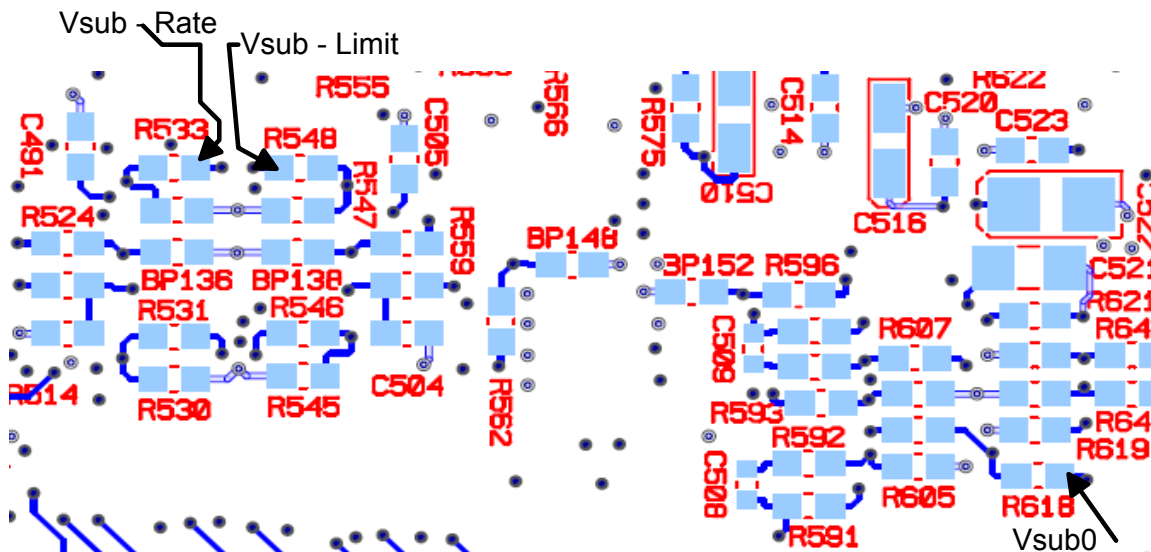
Vsub measurement nodes(3) - bottom View of Board
